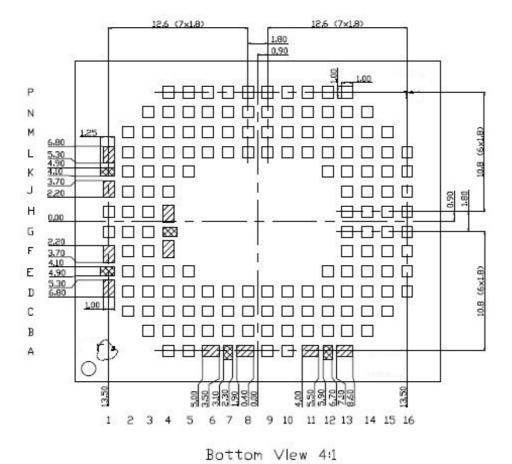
Dimensions of PLSx3 (all dimensions in mm)
